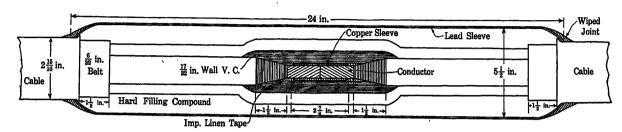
Construction and Dimensions of Varnished Cambric Joint Three-conductor, 300,000-cir, mils. sector, 25,000-volt cable
